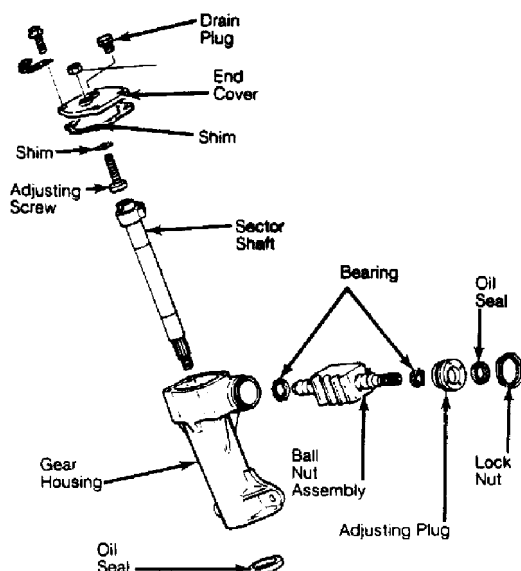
Exploded View of Steering Gear Assembly (B2000 and B2200 Pickups)
